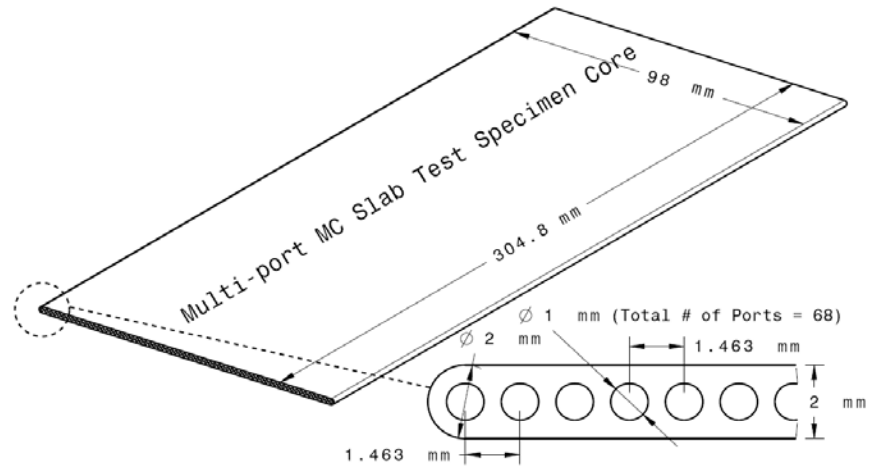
Channel cross section and shape used in current research (Straight slab)
